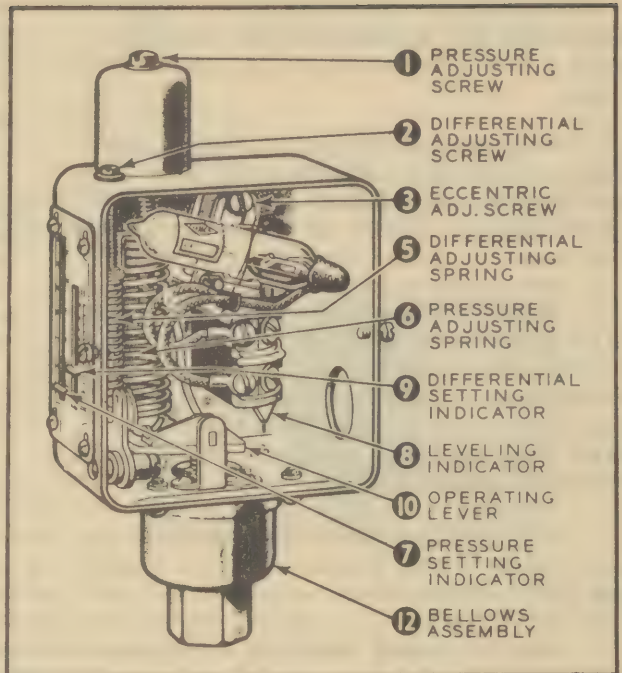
Type L404A Pressuretrol. Other types and Vacuumstats are similar except for type of mercury switch and arrangement of wiring terminals as shown in Fig. 6.
